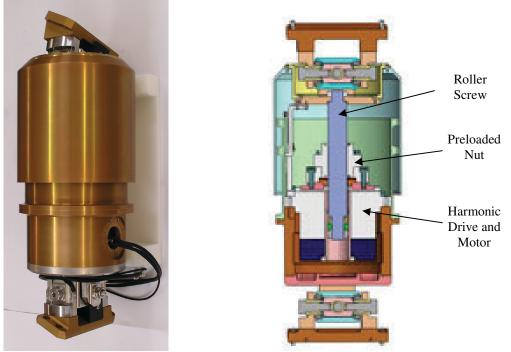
Photograph of hexapod strut (left) and cross-sectional view (right)
